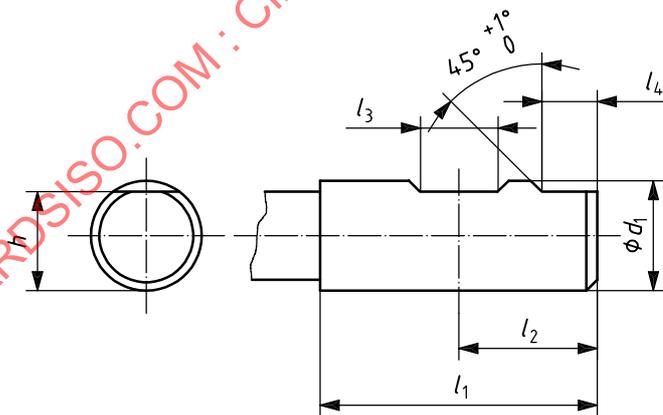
WE form — Flatted cylindrical shanks with double flat
